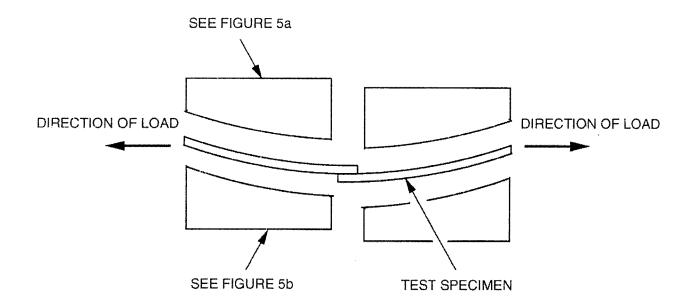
Arrangement of inspection fixture components relative to seam weld specimen.
